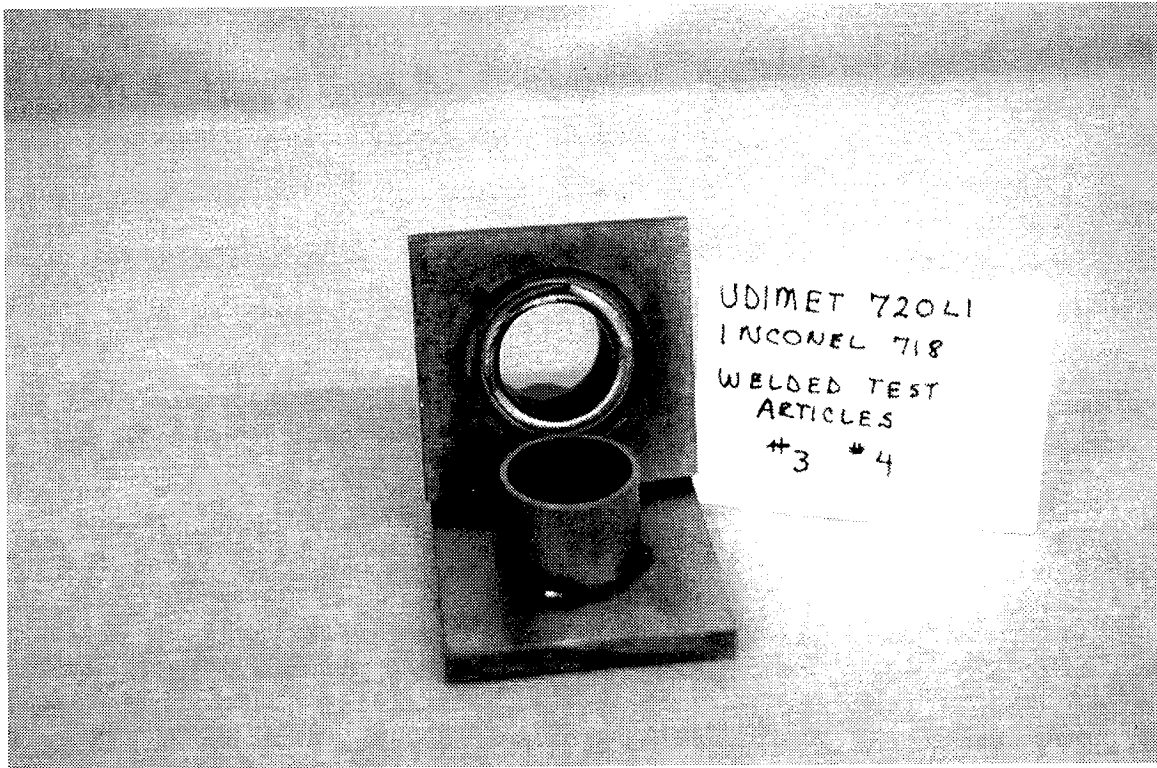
Unplated Ud720LI Tube to Unplated In718 Plate Weld Samples (Nos. 3 & 4).
